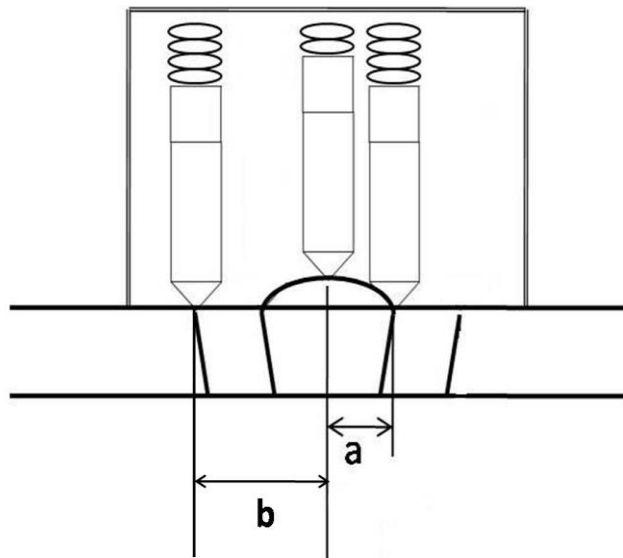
A front view of the field sensor array measurement of a girth weld. The sensors will be individually spring-loaded. The weld bead centerline-to-fusion line distance (a) and centerline-to-HAZ/BM boundary distance (b) will be adjustable.
